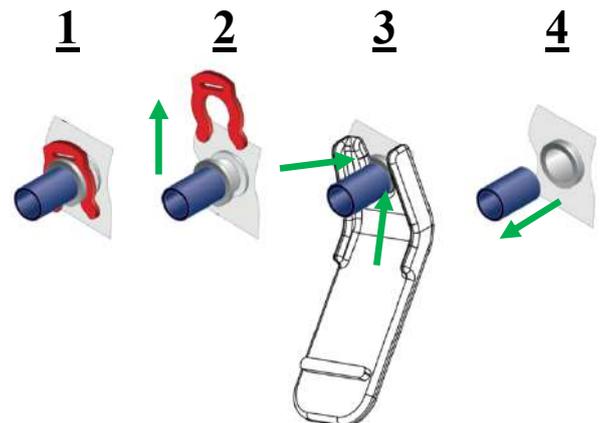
Disconnecting tubes and closing plugs from quick-release fittings on the Device casing.
